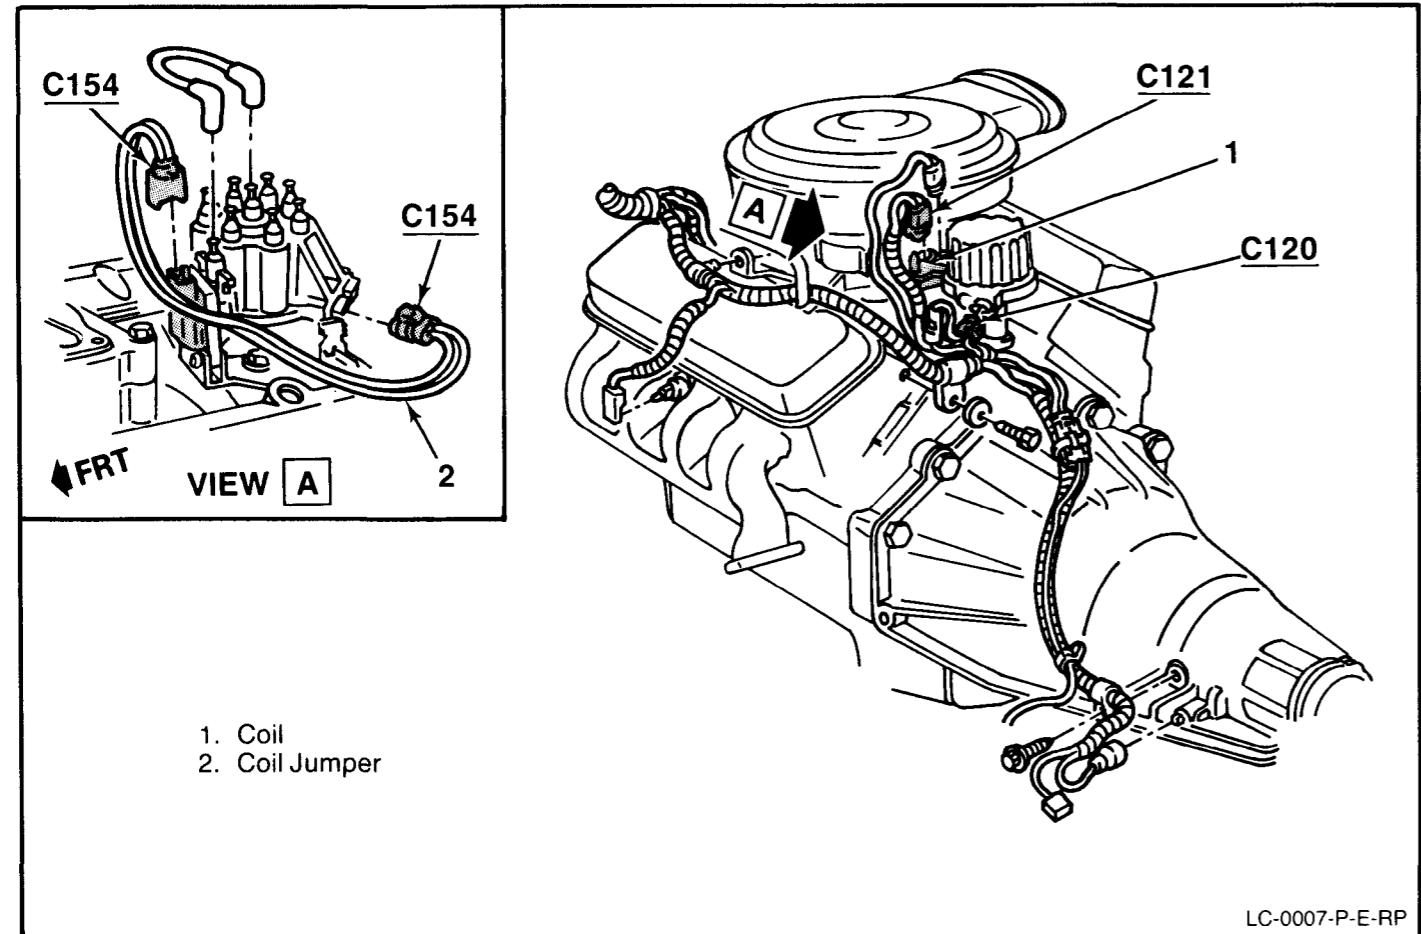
Engine Wiring Harness, LH Side (RPO L19 w/P32)
